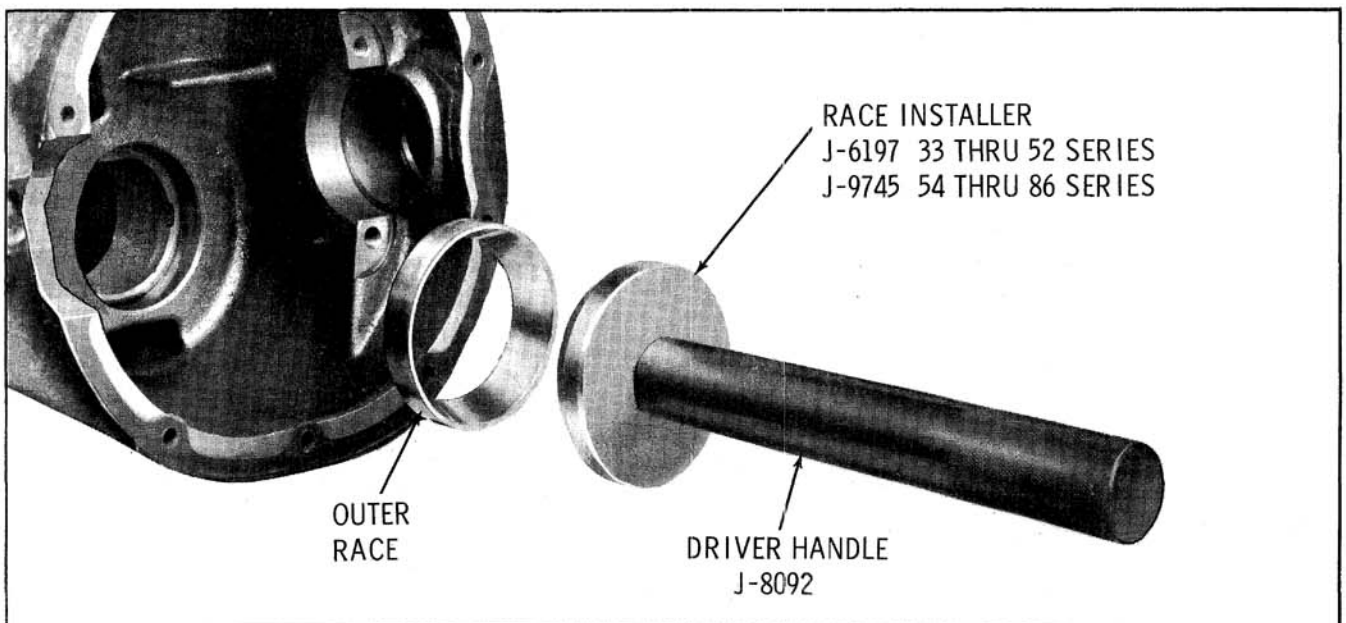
Installing Pinion Rear Bearing Outer Race
